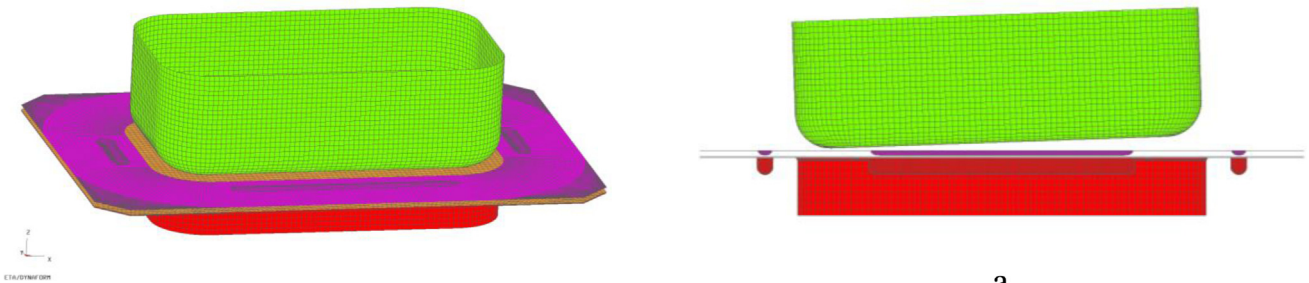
Numerical design of deep drawing process with blank holder and draw beads.
